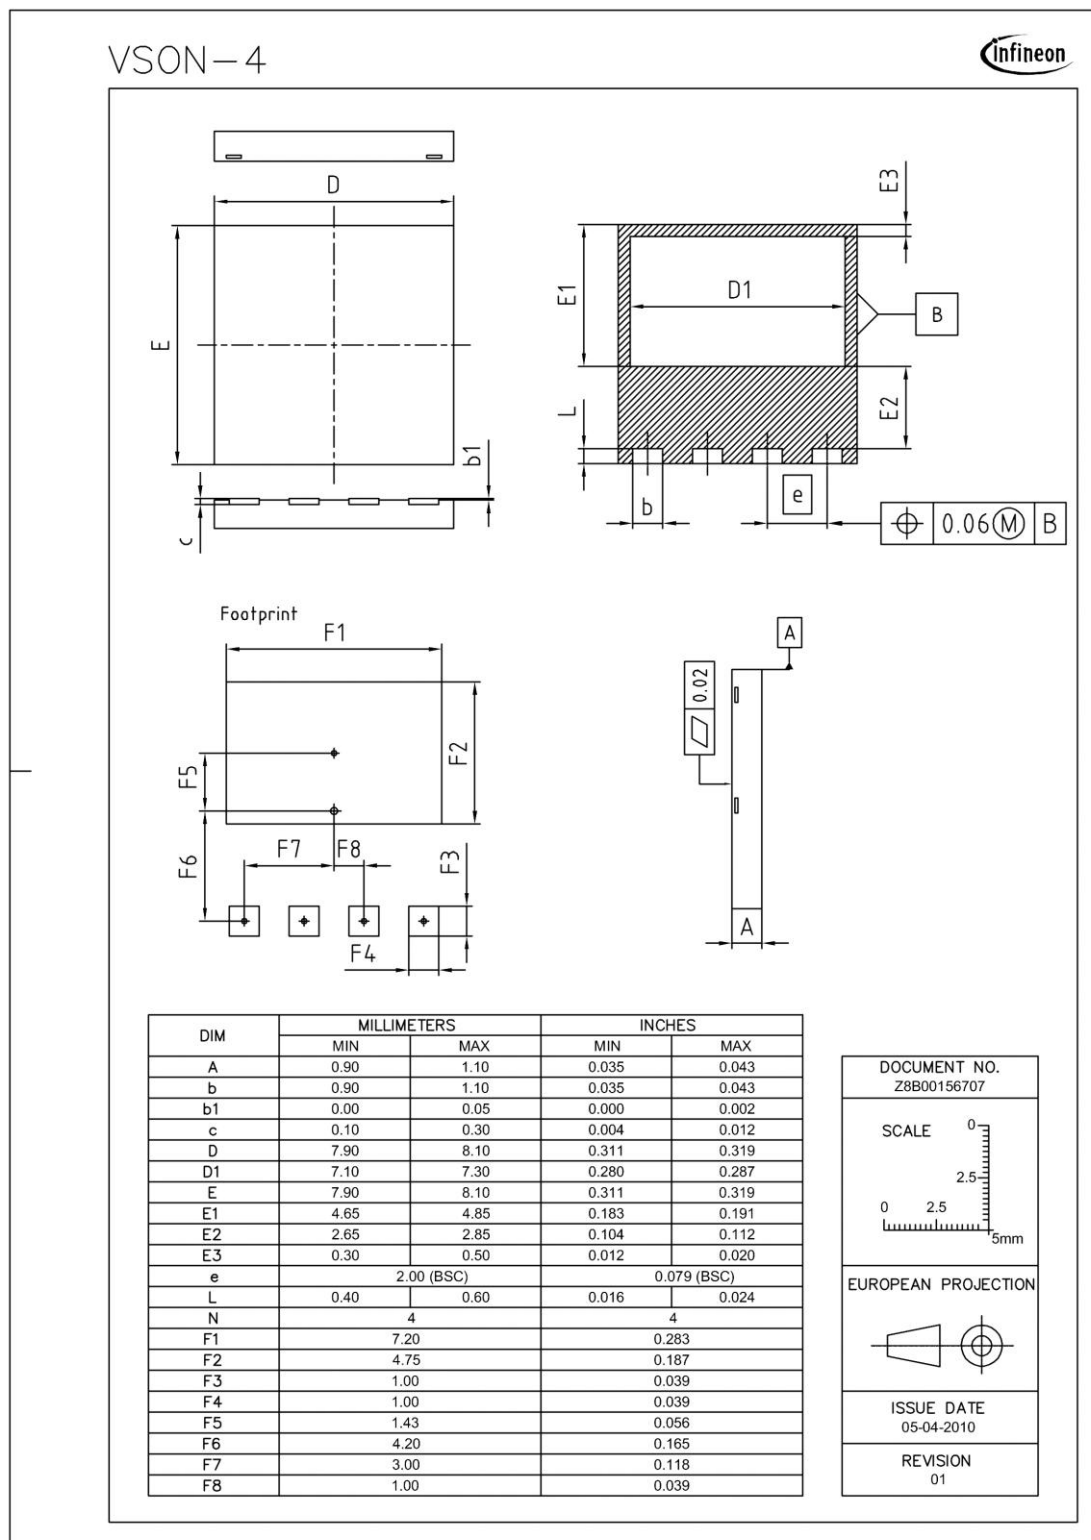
Outlines ThinPAK 8x8, dimensions in mm/inches
